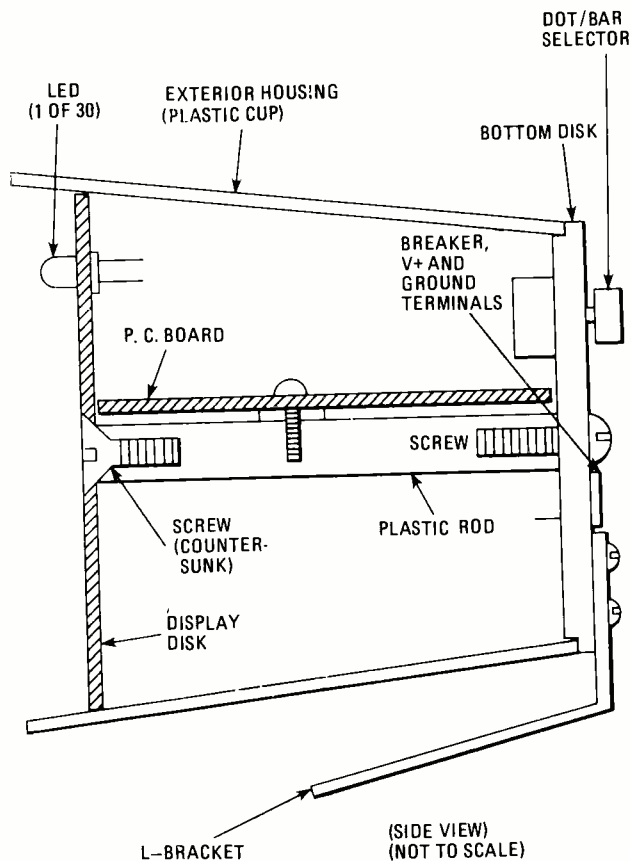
ASSEMBLY DETAILS OF THE TACHOMETER illustrate the packaging technique used by the author. If you cannot thread the plastic rod, use self-tapping screws into drilled holes. Be careful not to crack the plastic rod.
